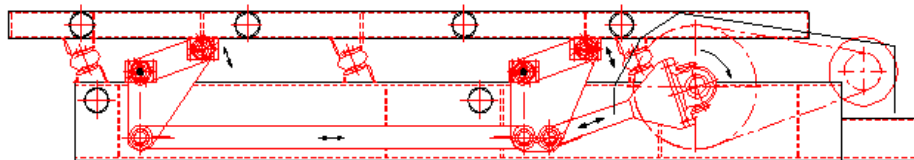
Principle drawing Dryer Drive Unit (Shaking Mechanism)
